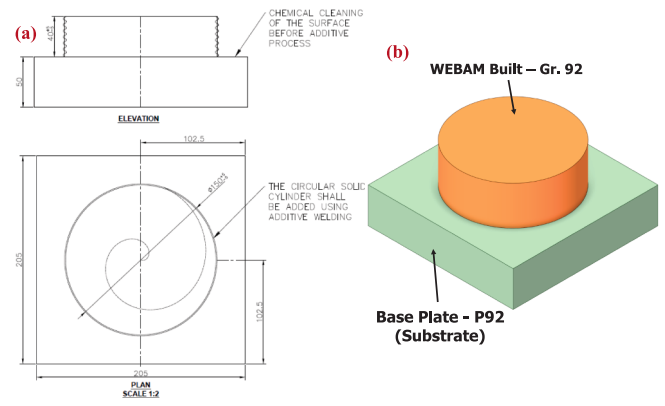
WEBAM distributor cylinder (a) detailed drawing; (b) representative CAD model.
